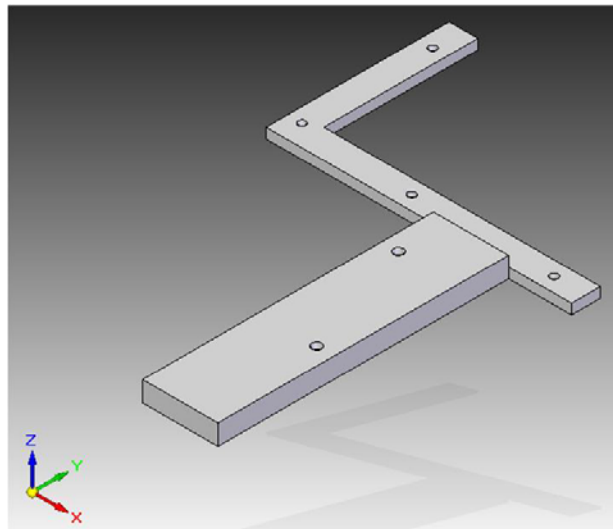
Custom base for Smart Pump and slider attachment to motion control system.
